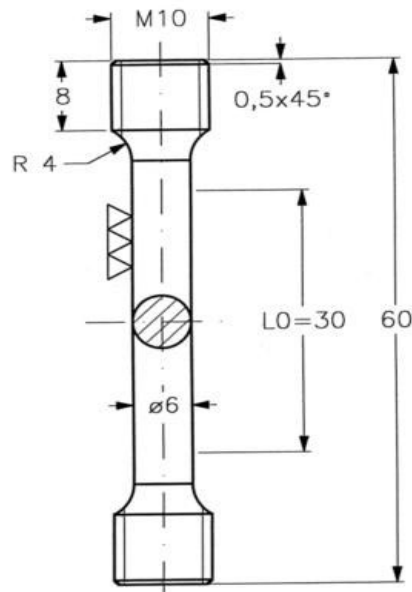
ST specimen Dimensions to DIN50125-B 6x30, Ø6 mm and gauge length is 30 mm
